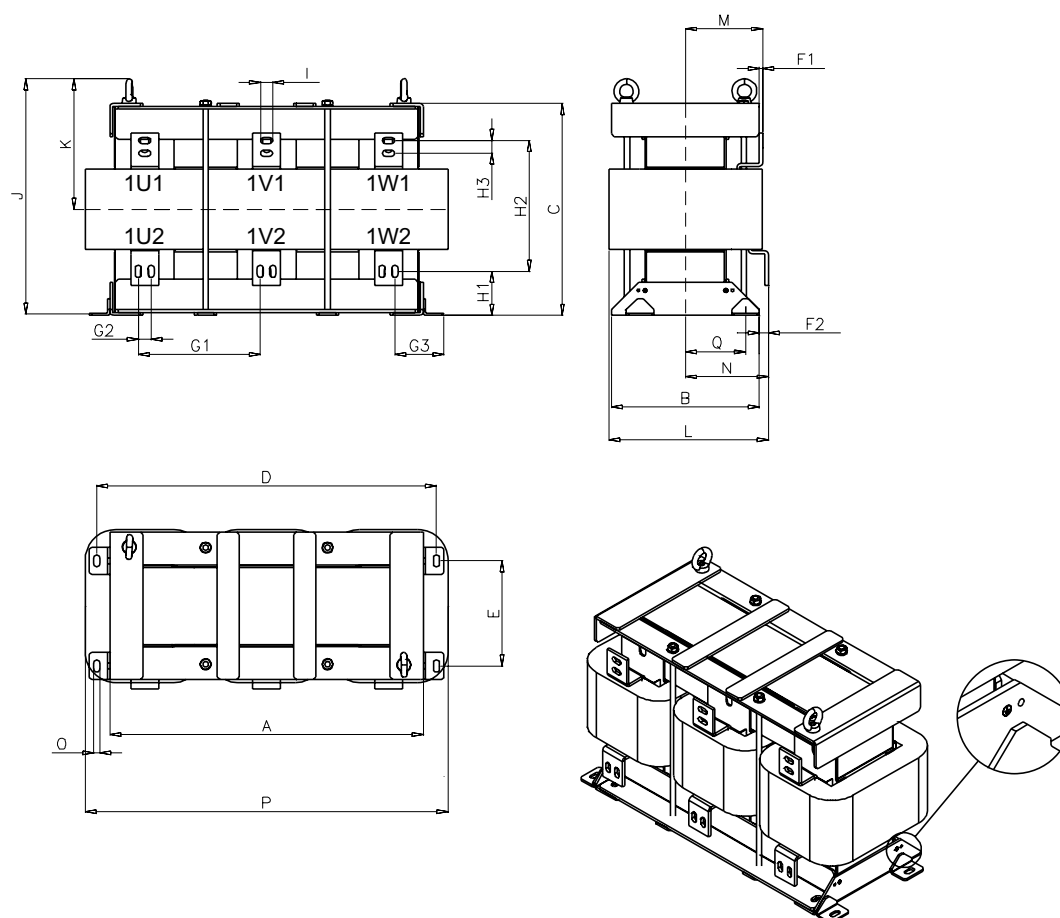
Dimension drawing of line reactor 6SL3000-0EE41-4AA0
